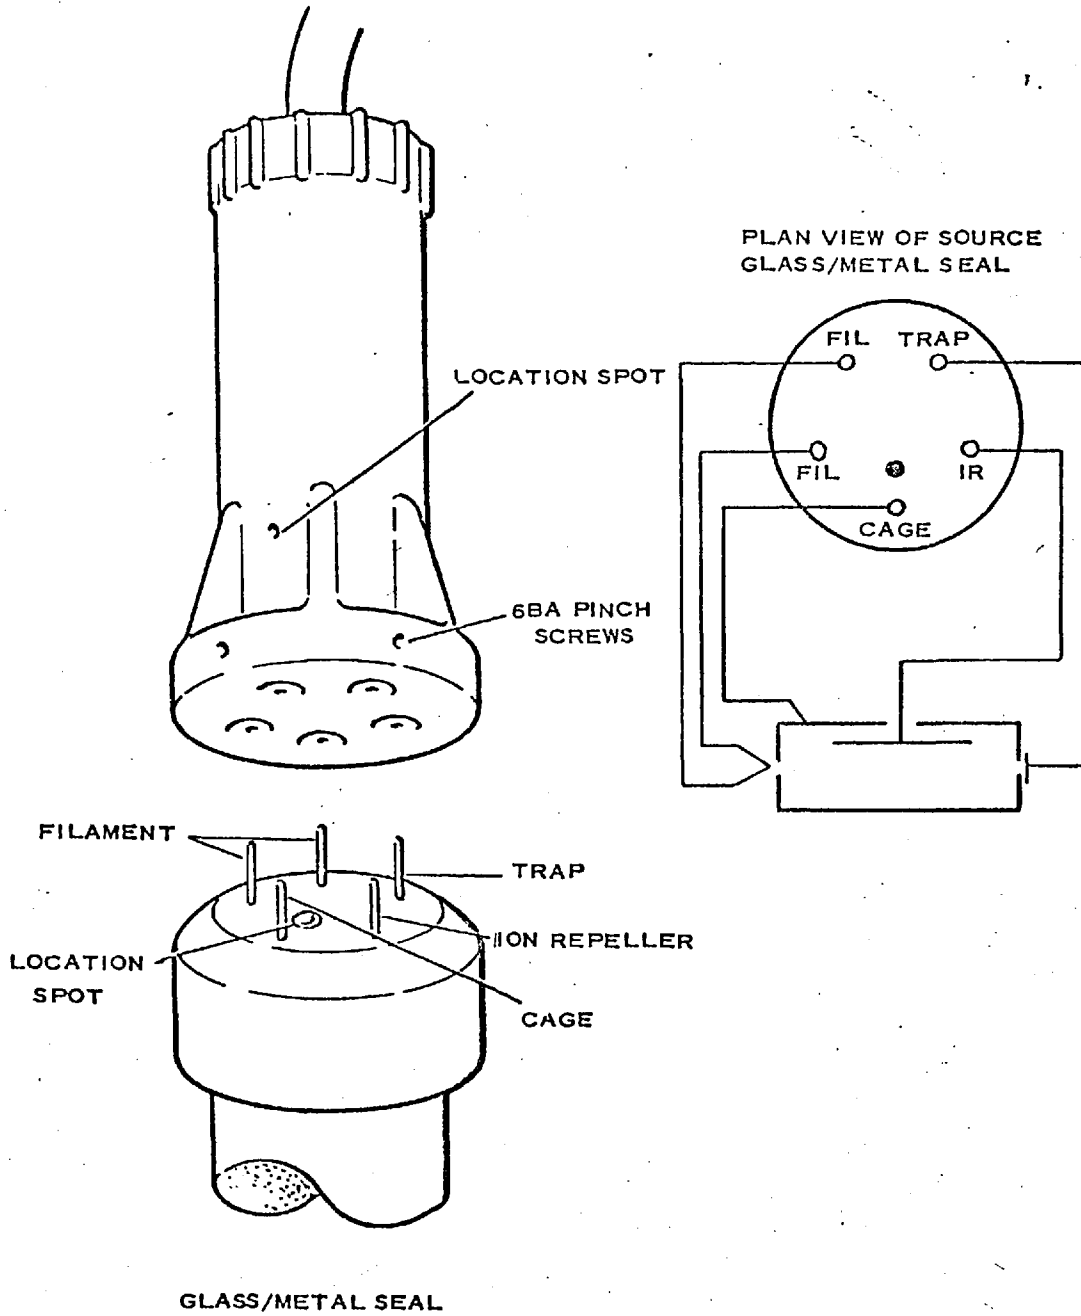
SOURCE-SOCKET AND DEMOUNTABLE 5-PIN GLASS/METAL SEAL
